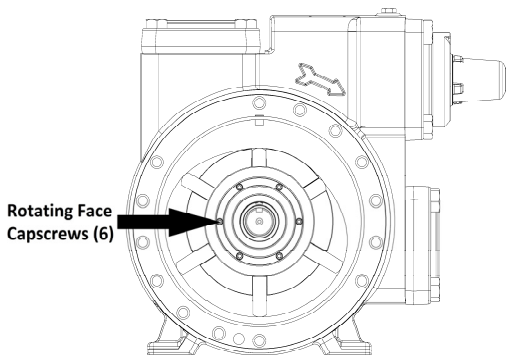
Rotating Face Capscrew Removal (Plan 52)
